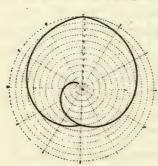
Spiral upon which the cam of the preceding fine adjustment screw is cut.
